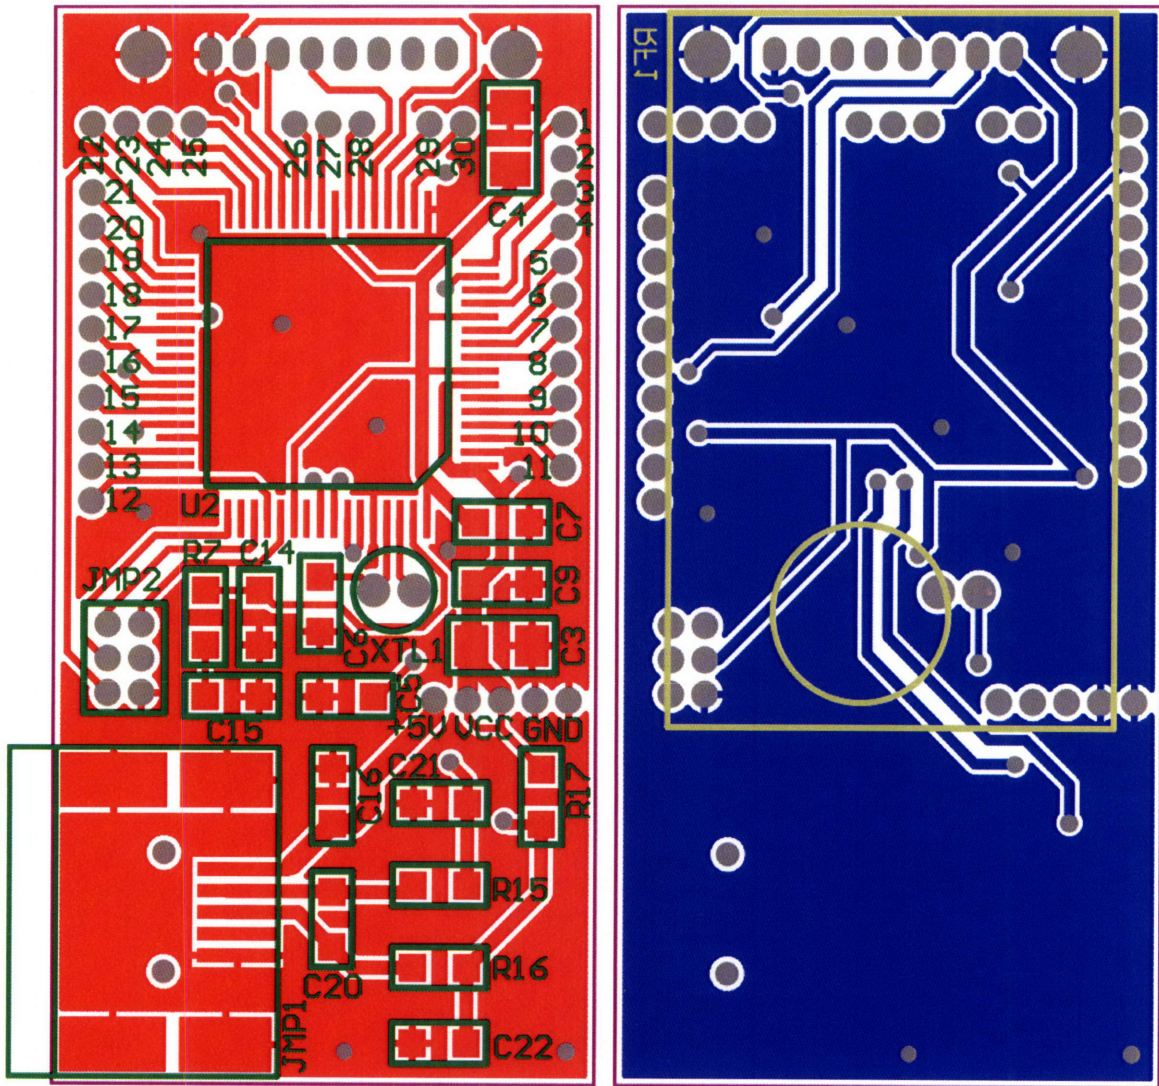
The top (left) and bottom (right) views of the Lug's circuit board layout.
